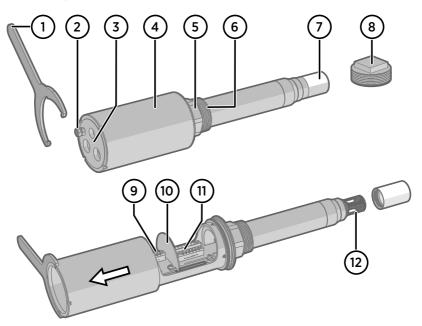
MGP261 Probe Parts (Closed and Opened View)
